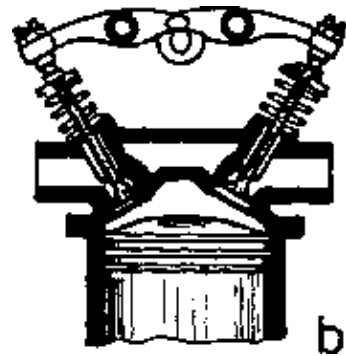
/16 Engine timing by means of overhead valves – with overhead camshaft
